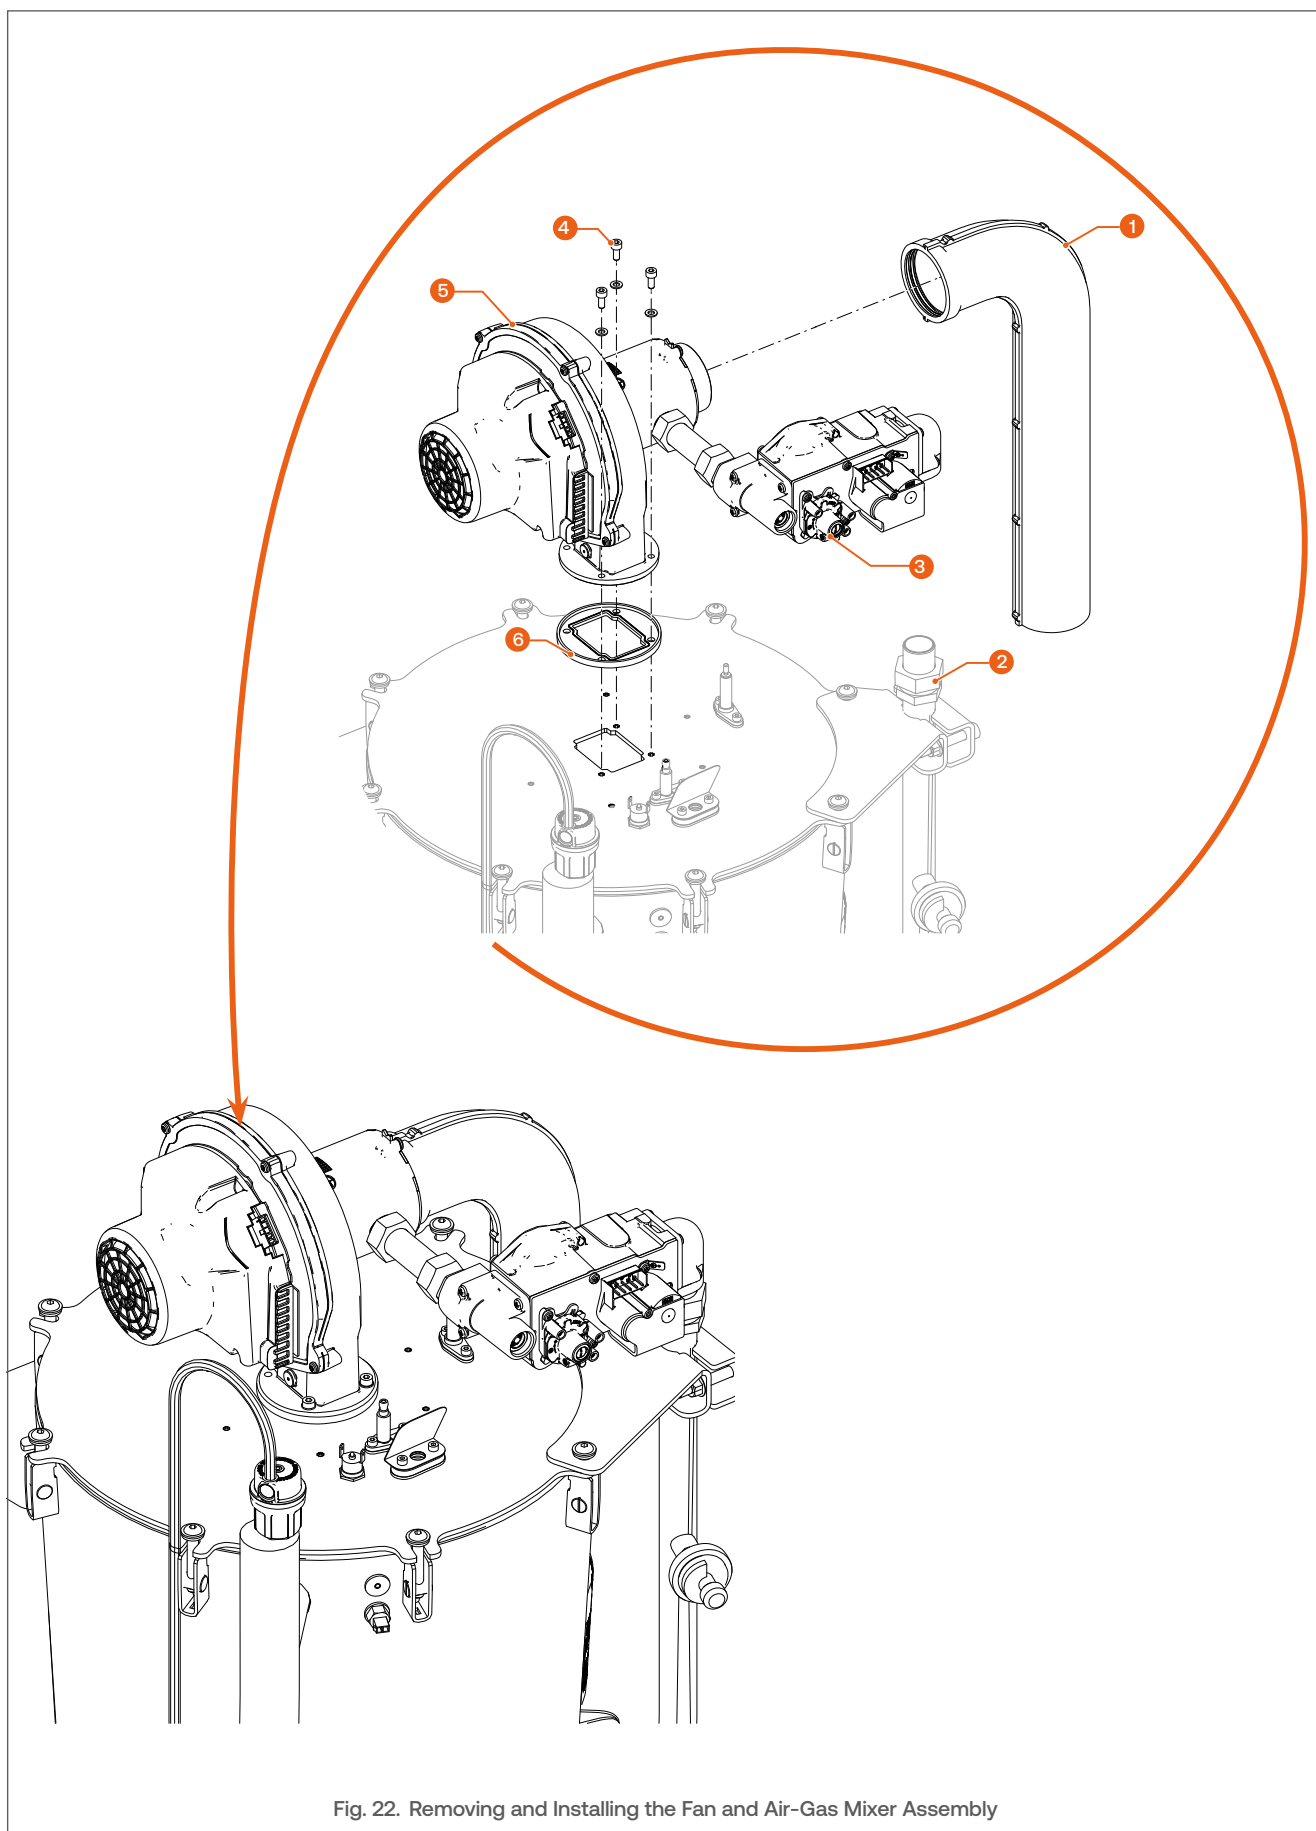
Removing and Installing the Fan and Air-Gas Mixer Assembly
